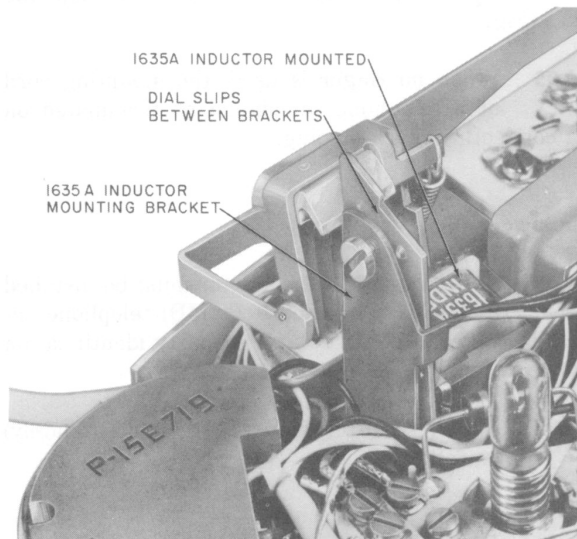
1635A Inductor Mounted in 701B (MD) Telephone Set
